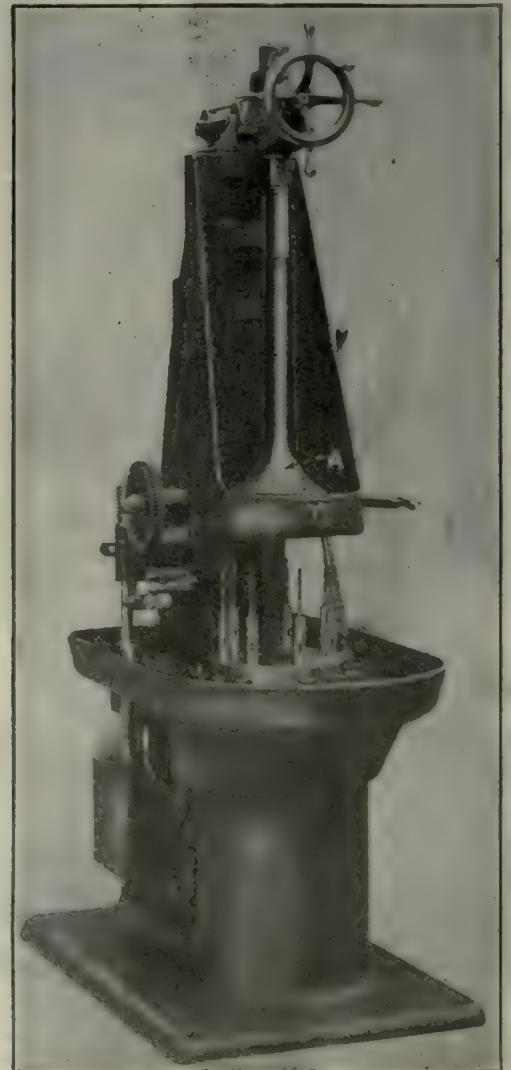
DRILLING REAR-AXLE HOUSING FOR CONVENIENT HANDLING
